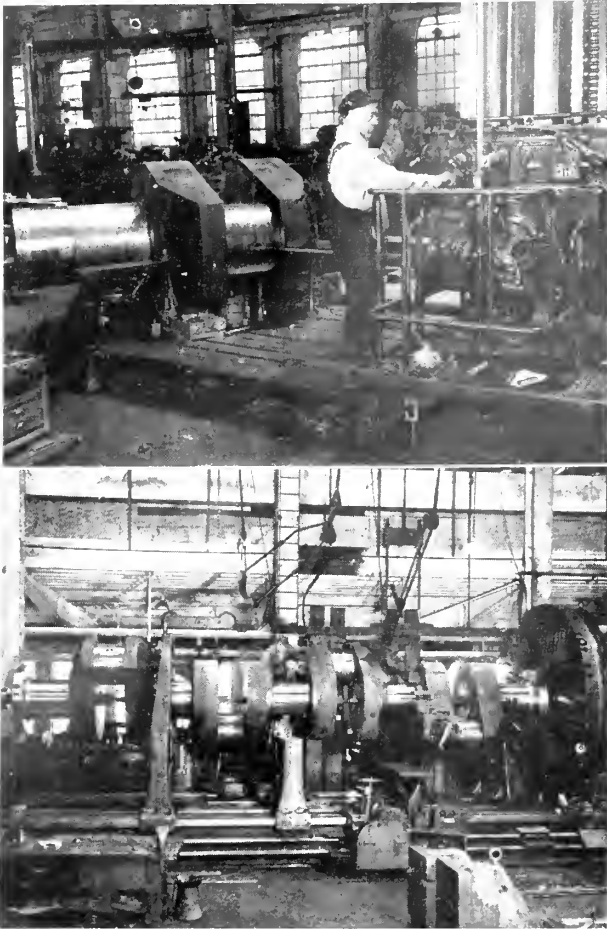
, below, top: Journals and couplings being finished, turned and polished in 125" lathe. This lathe also was used in final checking and inspector's approval. (Author and machinist inspect job.)
